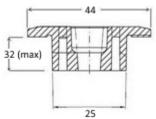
cross section of a mounting clamp to be used for attaching the modules to support structure (minimum length is 40 mm).
